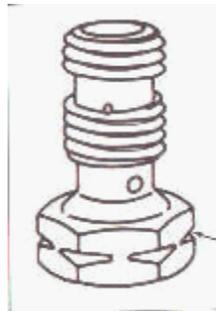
The Viton seat used on some Tecumseh carburetors must be installed correctly to operate properly. All-metal needle is used with seat shown.
